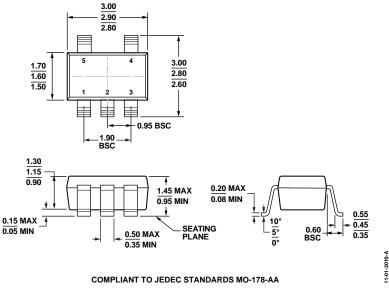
5-Lead Small Outline Transistor Package [SOT-23] (RJ-5) Dimensions shown in millimeters
